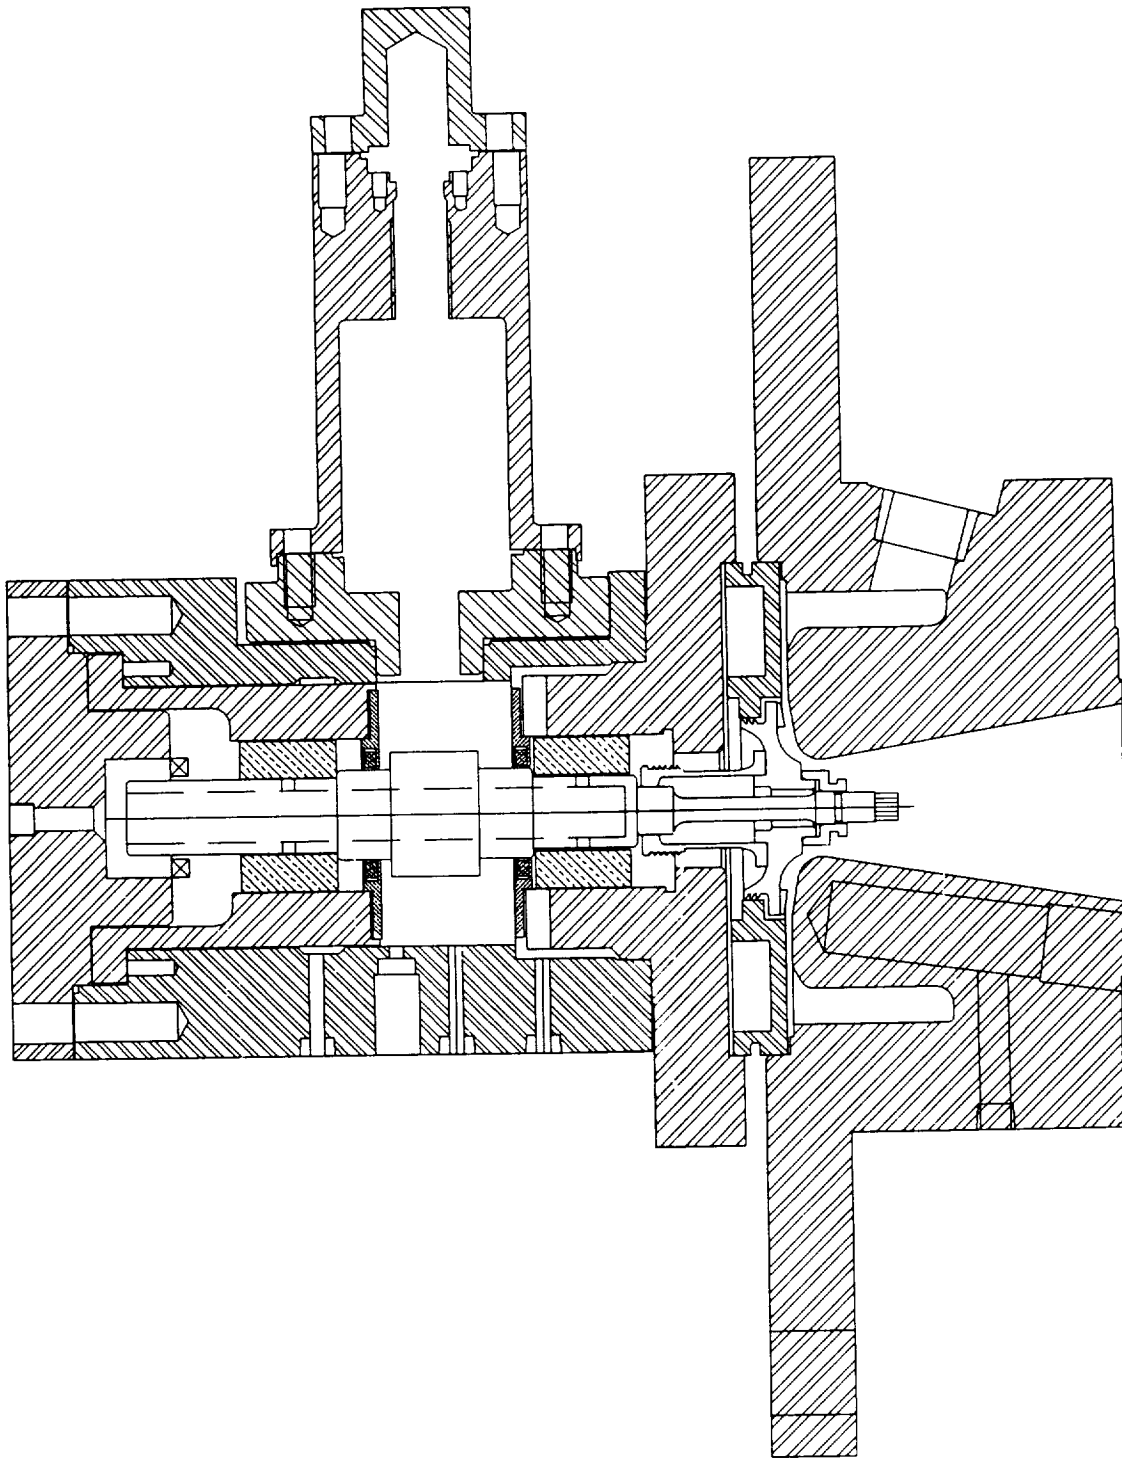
Fluid supply concept for internally fed bearing using shaft end bore
